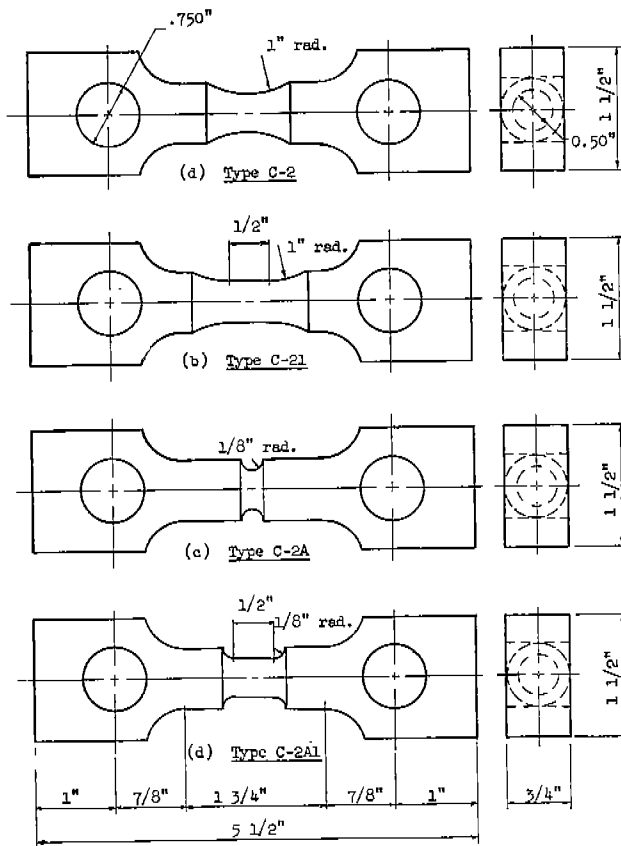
DETAILS OF TYPES C-2, C-21, C-2A, AND C-2A1 SPECIMENS.
